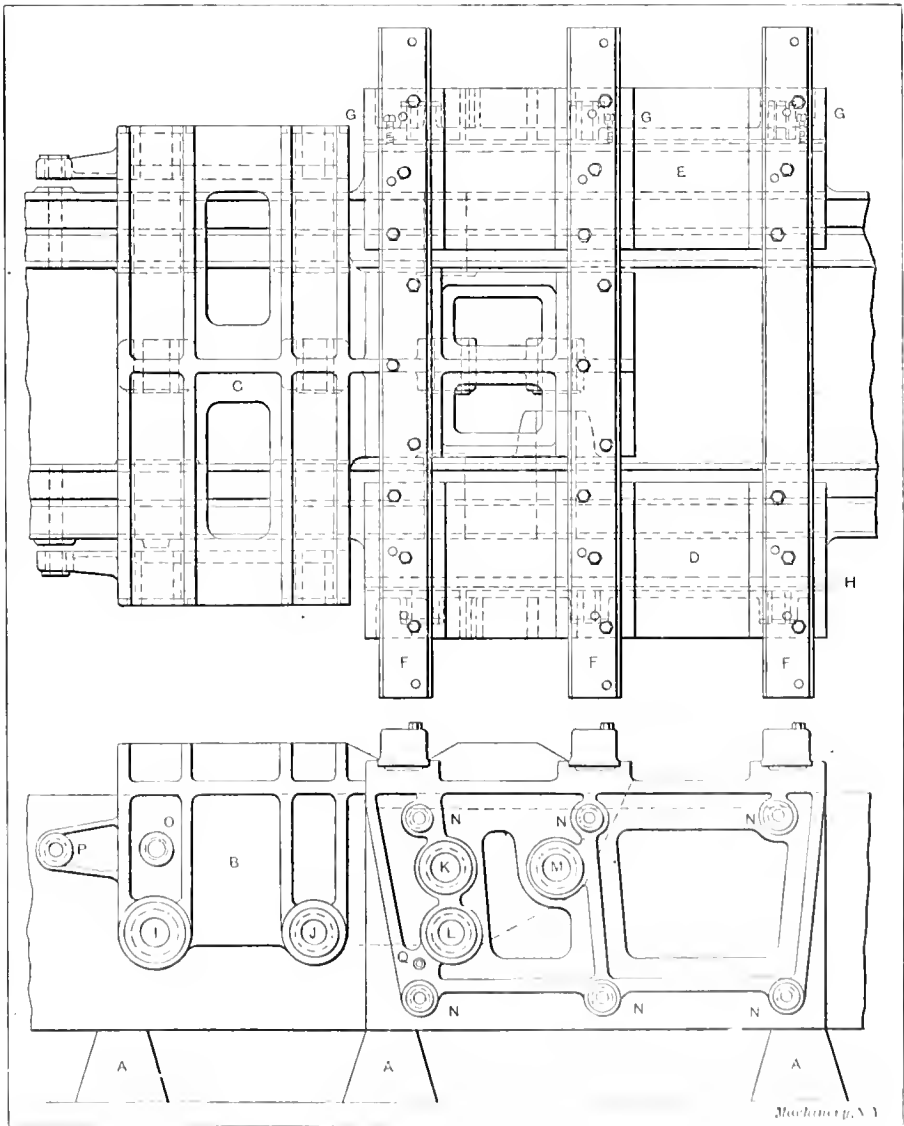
Combination Boring and Drilling Jig in Position on the Bed
